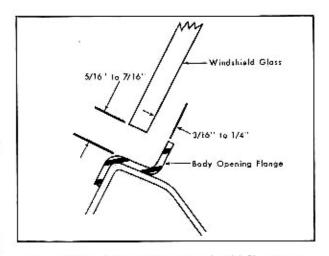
Windshield Glass to Pinchweld Clearances
